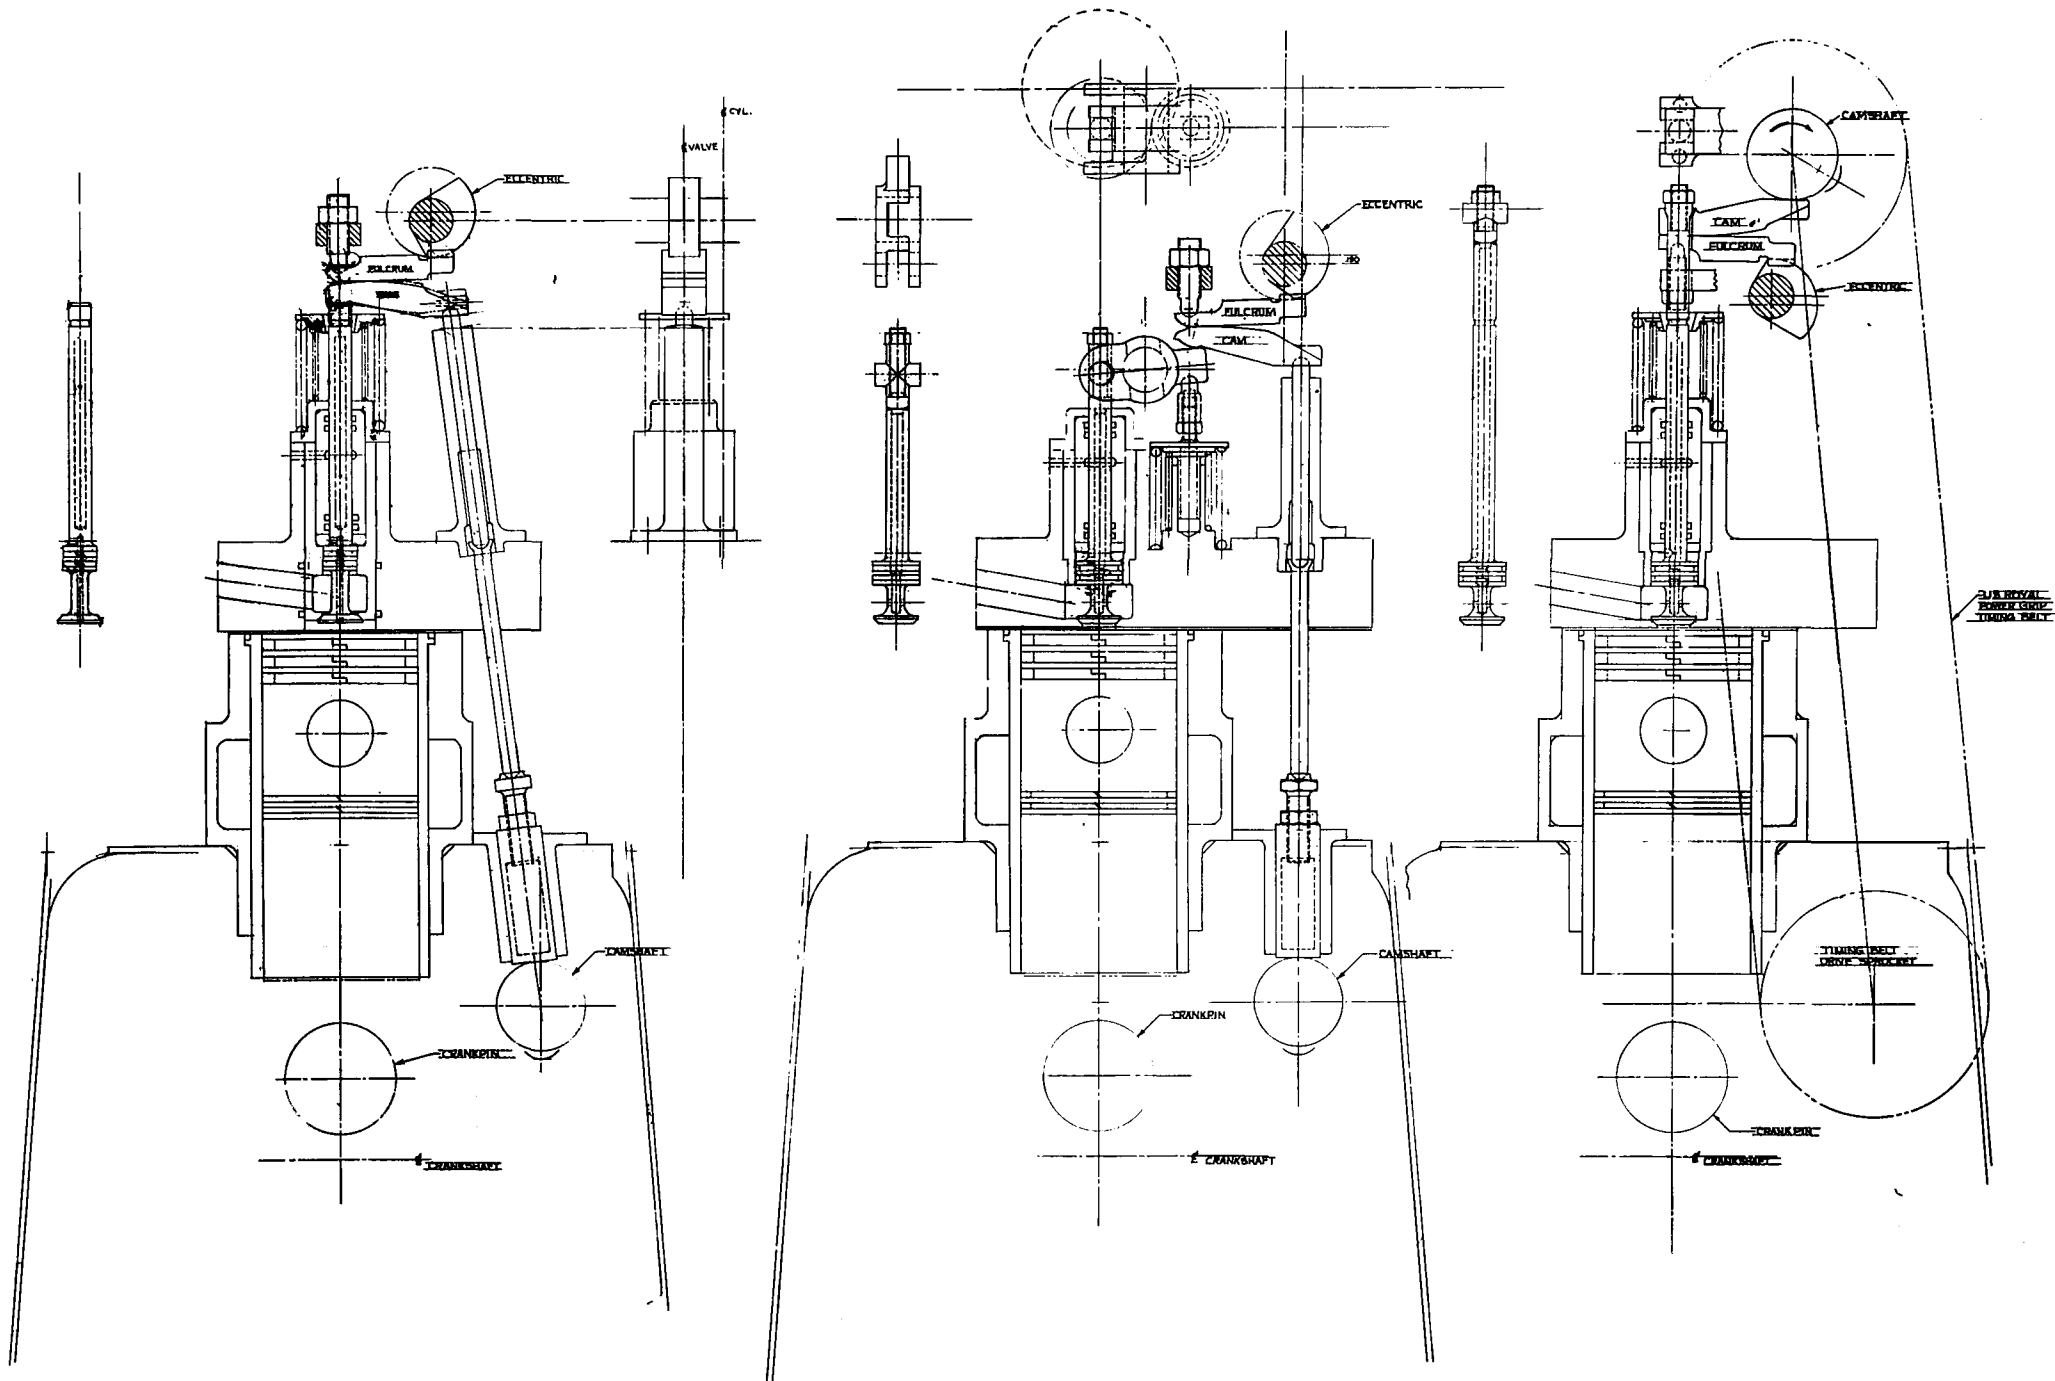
Valve - Variable Cut Off Mechanism.
